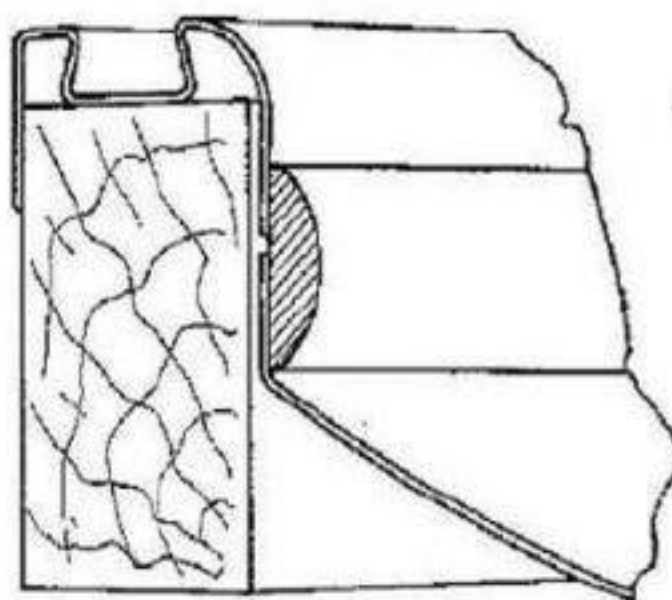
and Early 1926 Shroud Bar Cover and Shroud Flange Joint Construction
